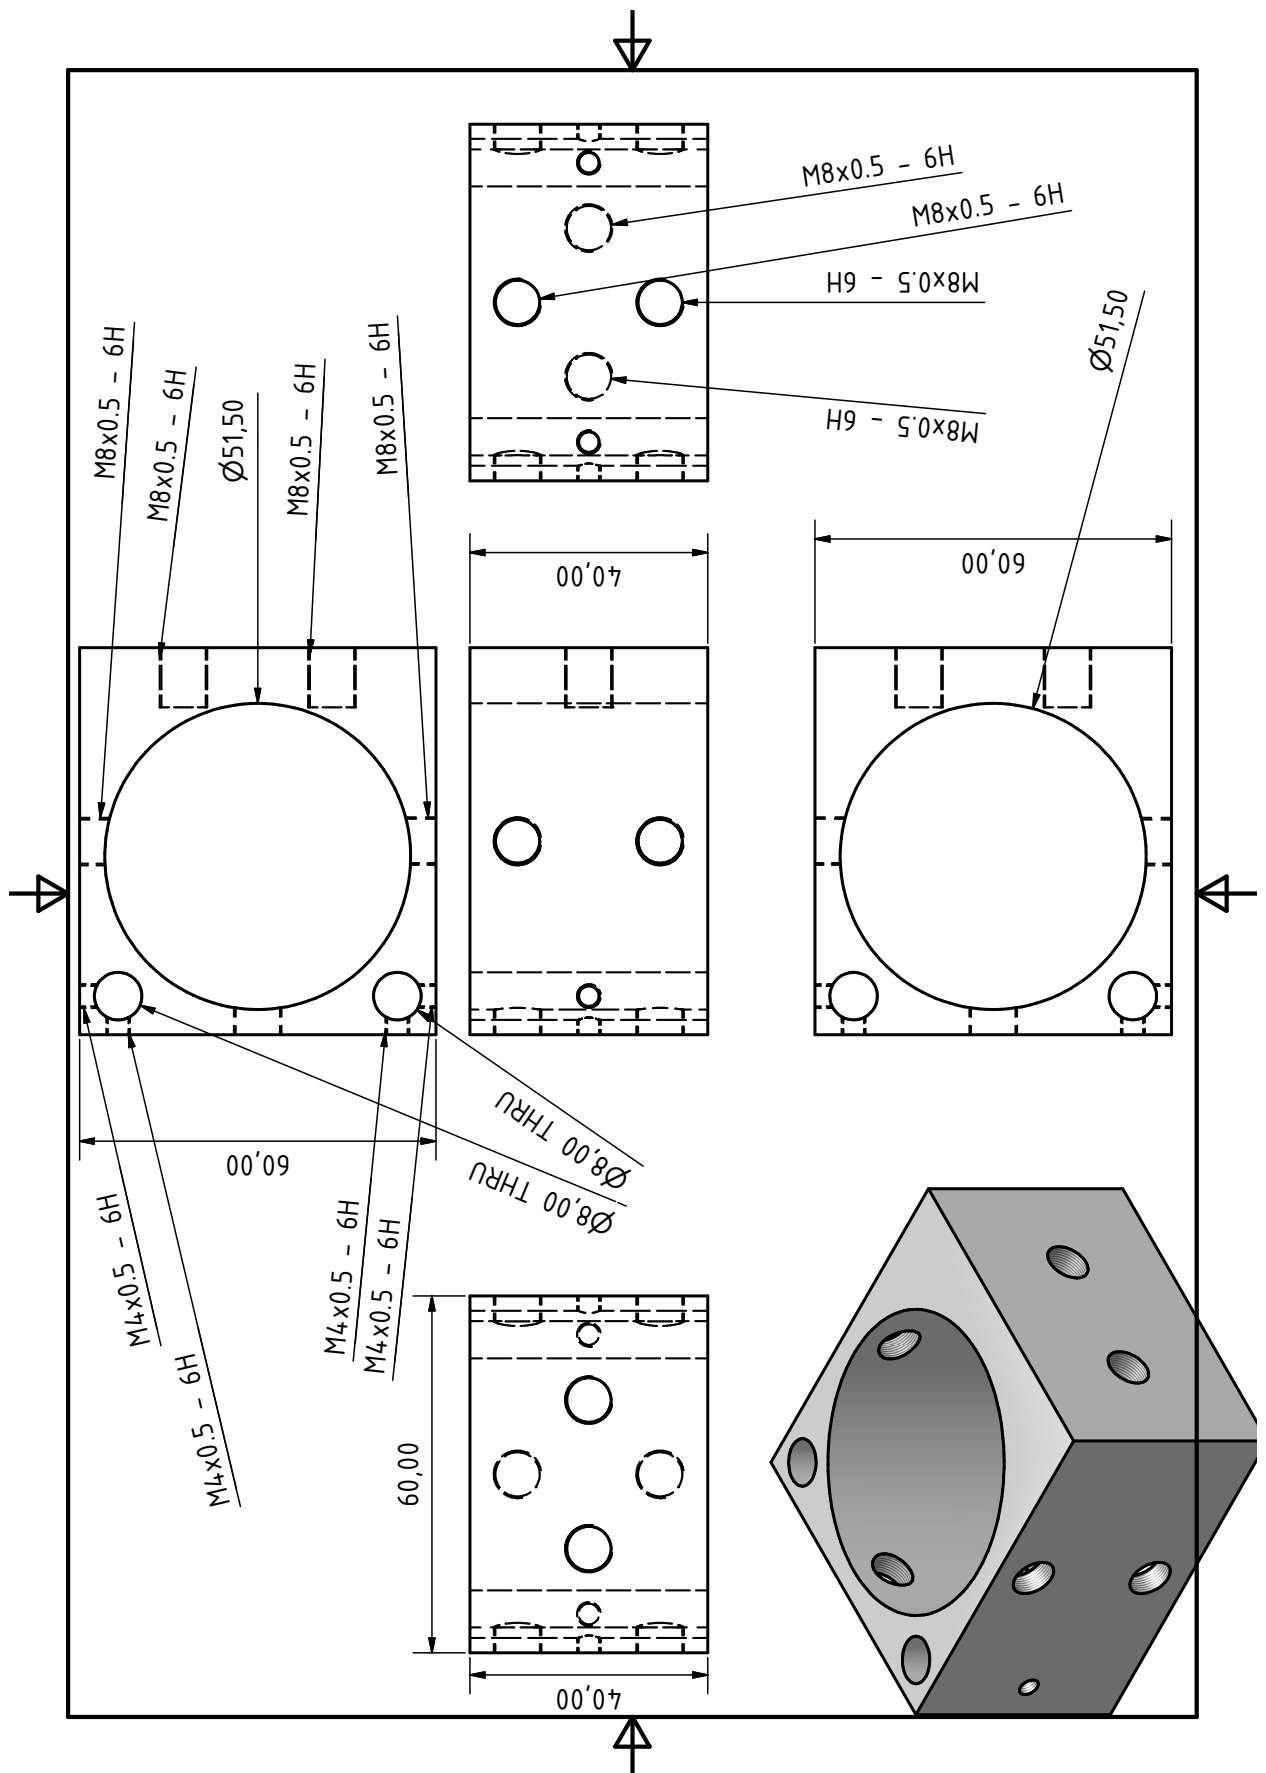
CAD sketch of laser to carrier plate connection cube.
